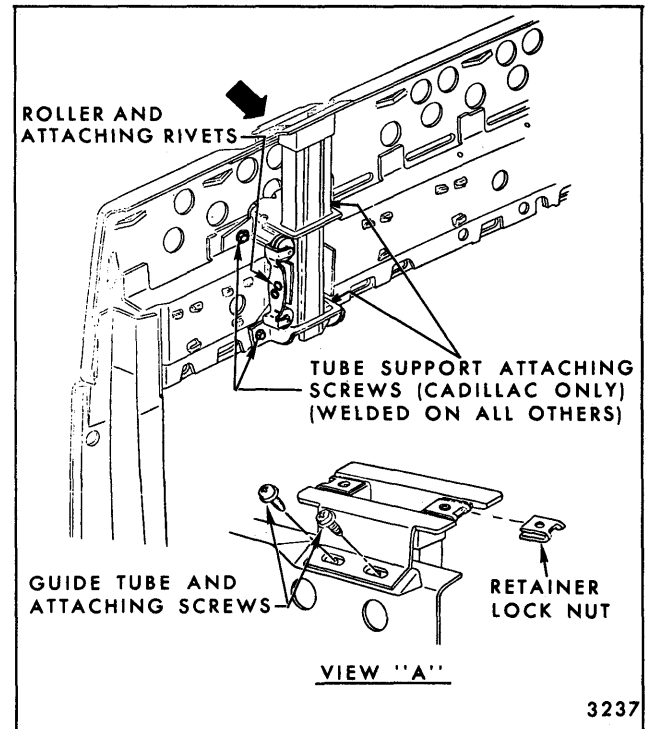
Head Restraint Guide Tube and Roller Typical of All Standard Seats Except Cadillac
